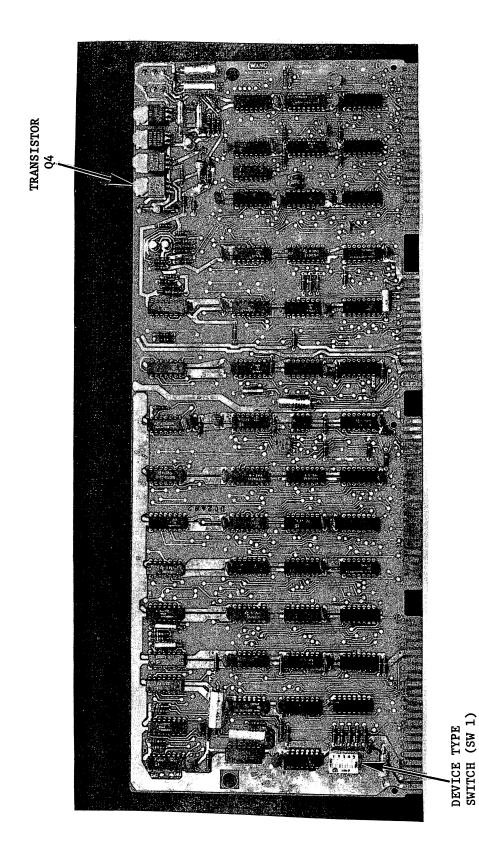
210-7636 PCB FOR MODEL 5581W PRINTER
